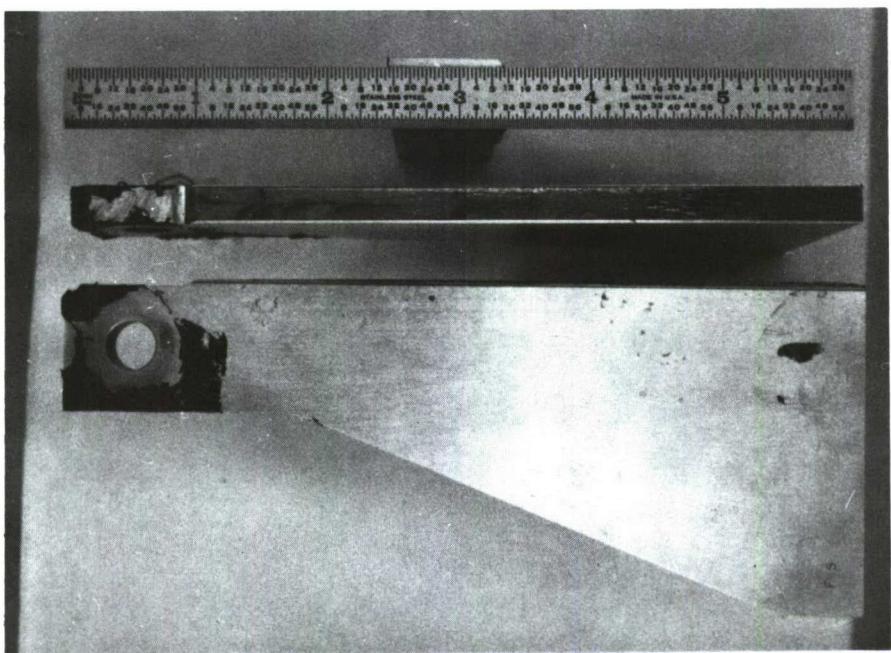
Fracture Surface of a Mostovoy DCB Fatigue Crack Growth Specimen Tested in Distilled Water
